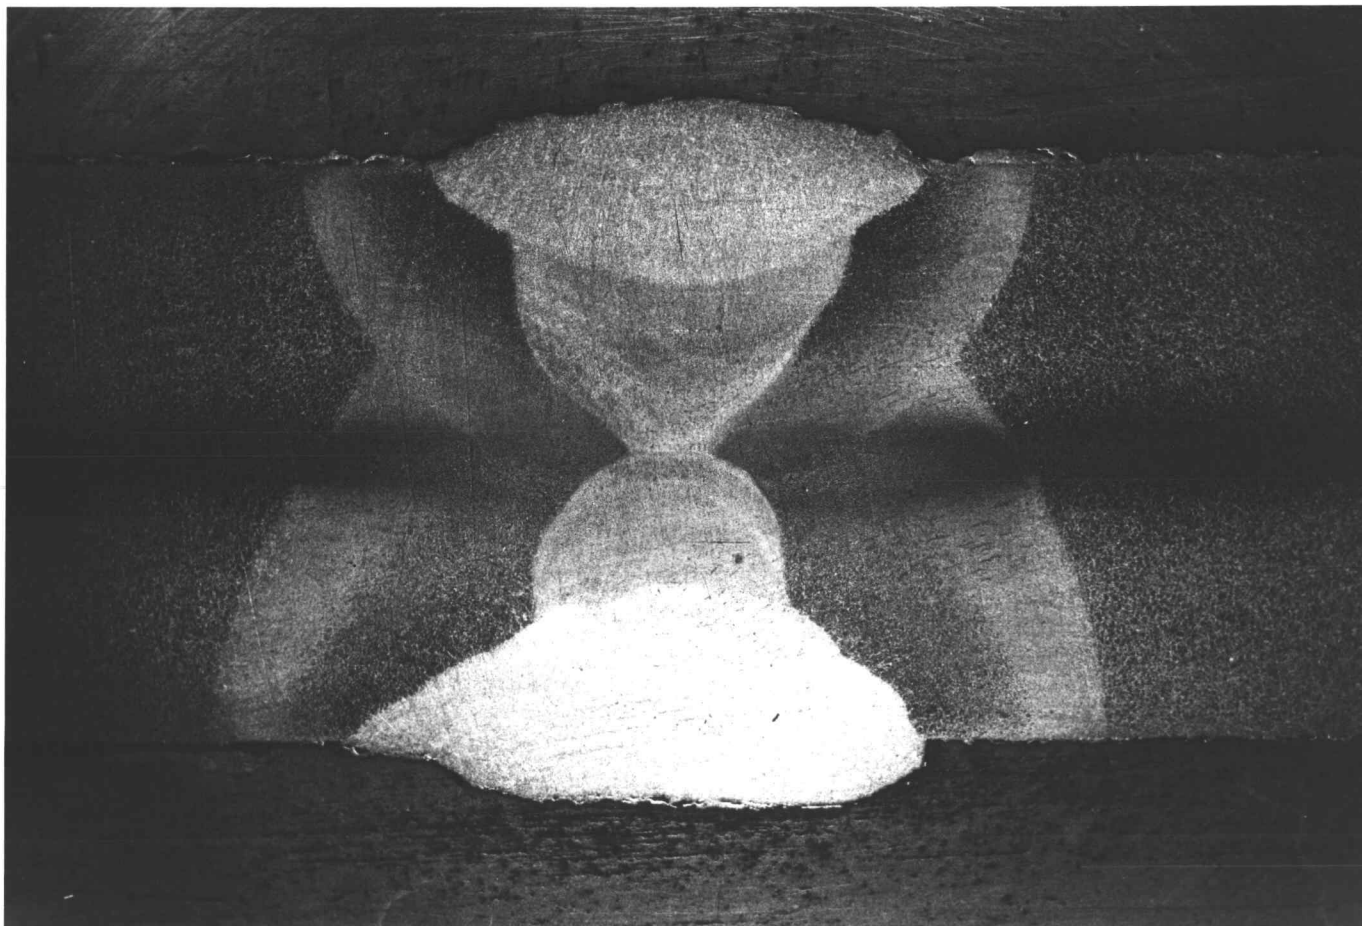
Macrograph of Weld Plate C Showing Deposited Metal,
